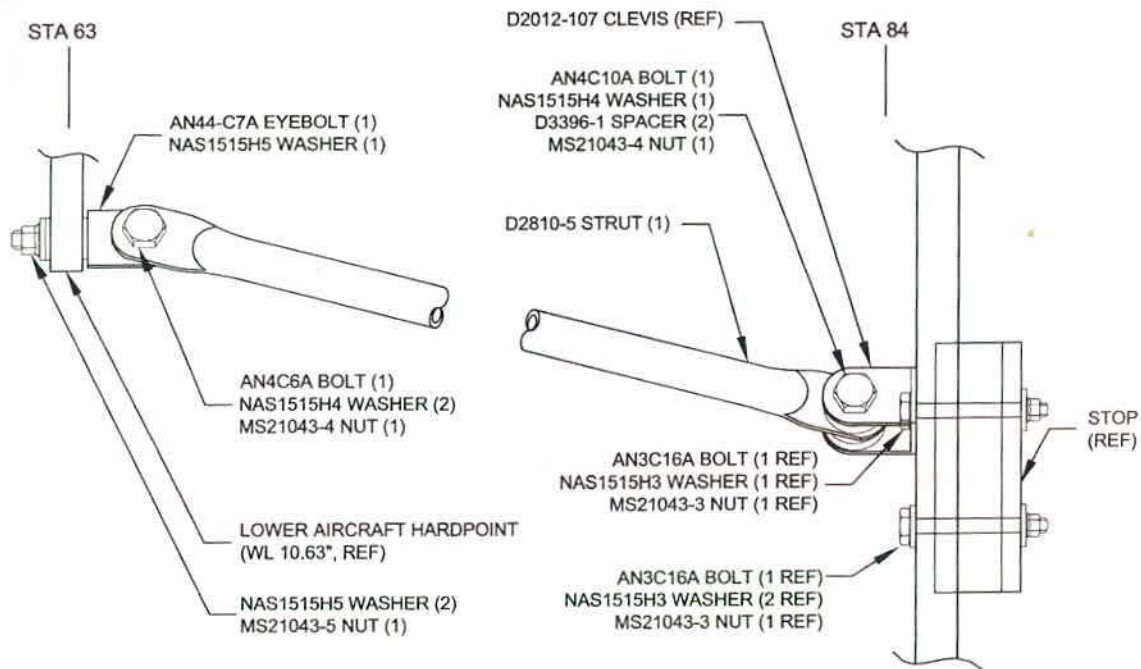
Strut Detail for D412-630-033/-034 *Heli-Access-Step™* Installation
